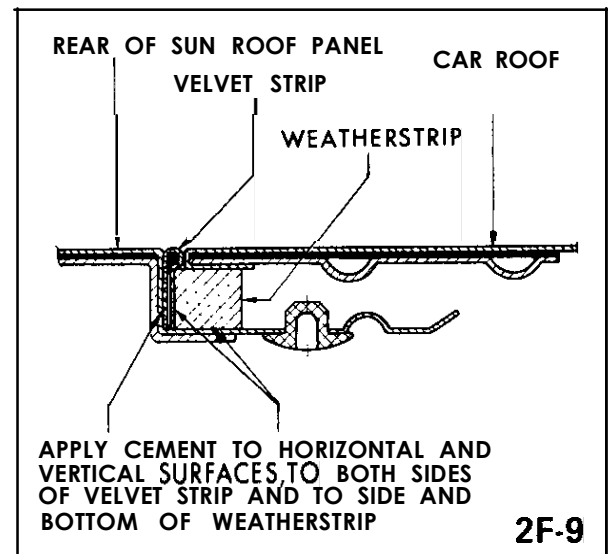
F-9 Installing Velvet Strip and Weatherstrip on Rear of Sun Roof Panel
